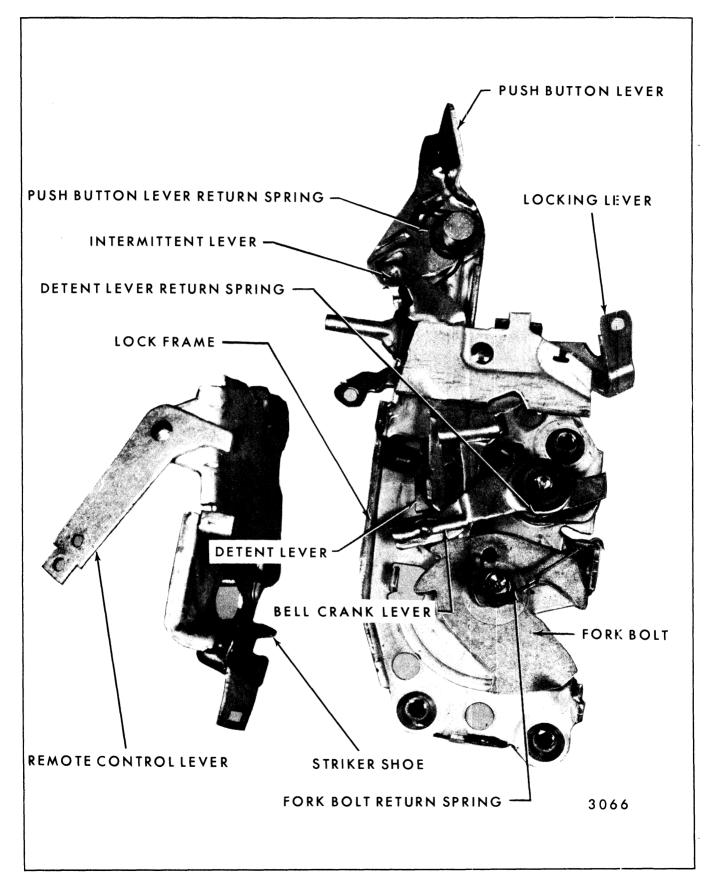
Front Door Lock Assembly - "F and X" Styles
